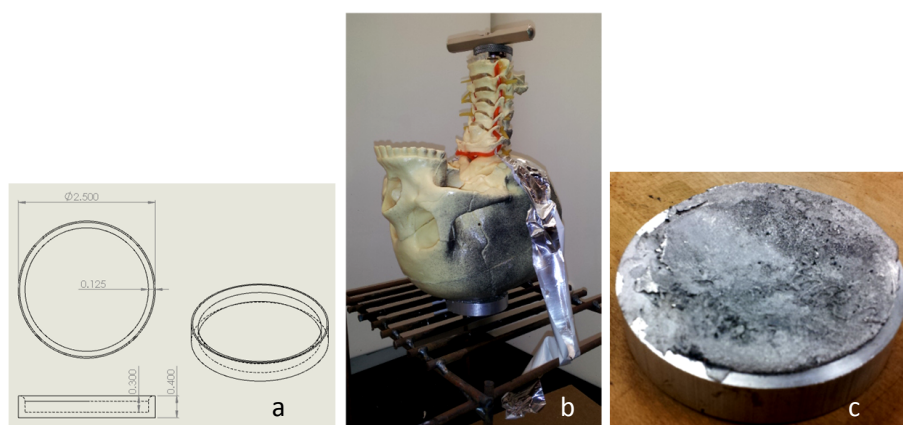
a) dimensional drawing of casting cup b) skull positioned on top of casting cup to mold the bismuth alloy while it cooled - An air bubble level is placed on the spacer washers to help align mold c) photo of molded bismuth alloy inside aluminum casting cup - bismuth alloy was melted using a propane torch.
